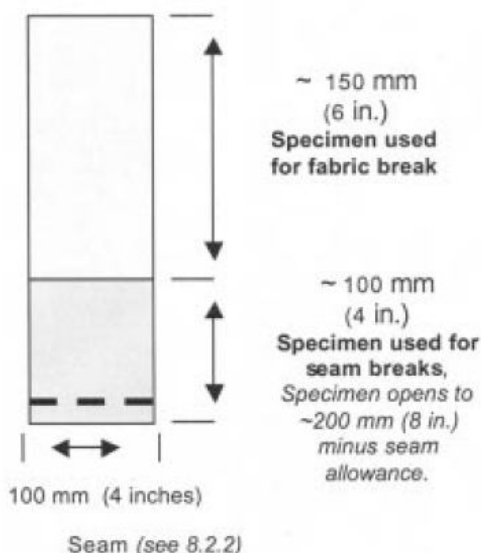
Seamed Specimen Dimensions Prepared from Fabric
